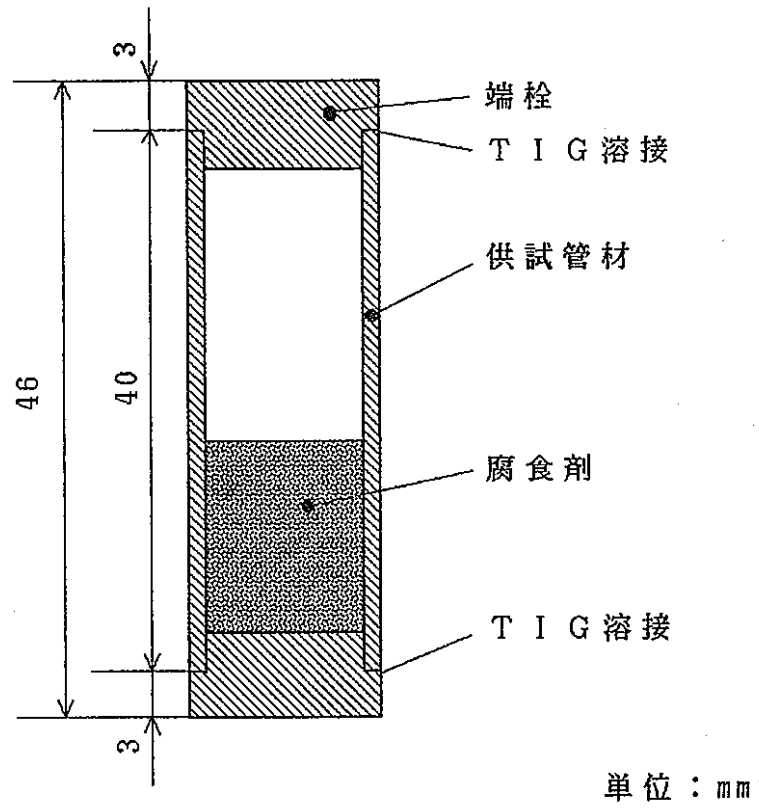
Corrosion Test Specimens with CsOH-CsI Mixture or Te
